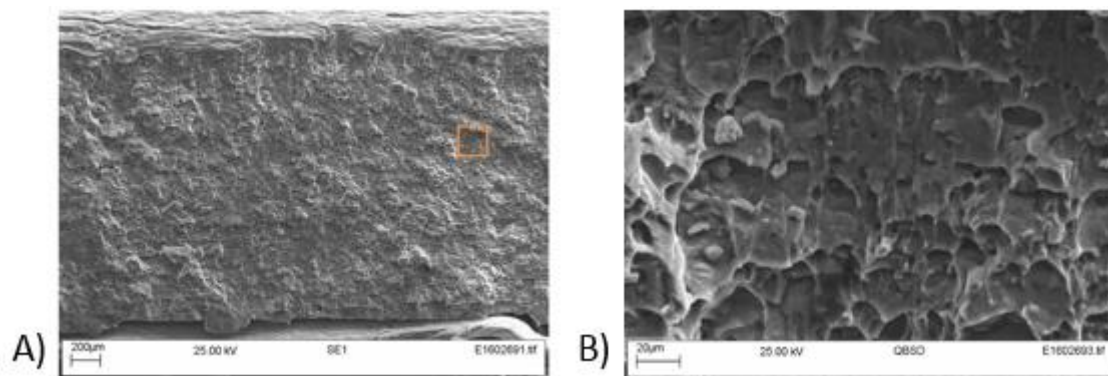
A) Fracture surface of sample W12 ($v = 1200$ mm/min; $\omega = 2000$ rev/min) and B) magnification (Courtesy of TWI, Ltd).
